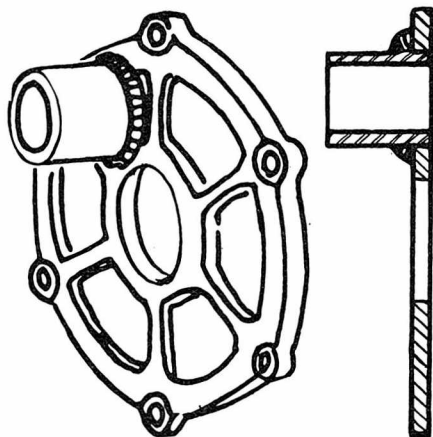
View of rotary valve cover showing method of installing tube for larger carburetor. Outside diameter of tube must fit carburetor and inside diameter of tube should match carburetor bore.
